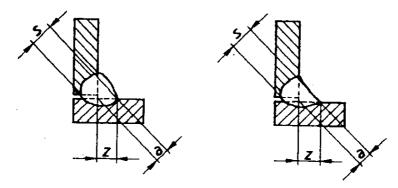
Methods of indicating dimensions for fillet welds
